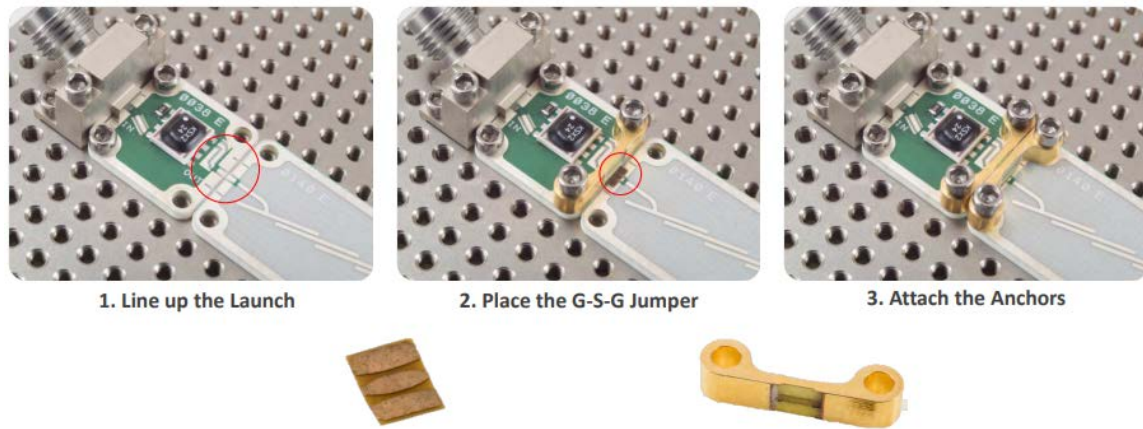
Launch-to-launch solderless interconnect. Source [38].
